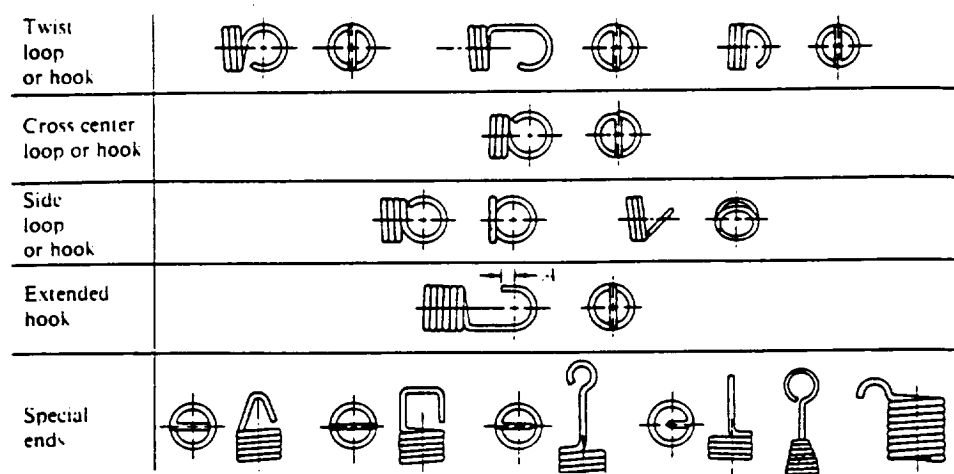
HELICAL EXTENSION SPRING END CONFIGURATION [3]
